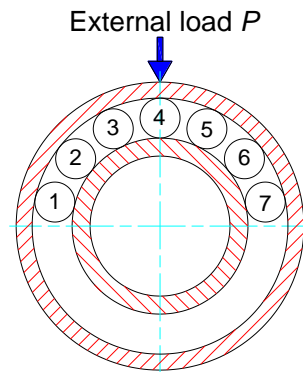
Mechanics model used for contact analysis of the roller bearing
